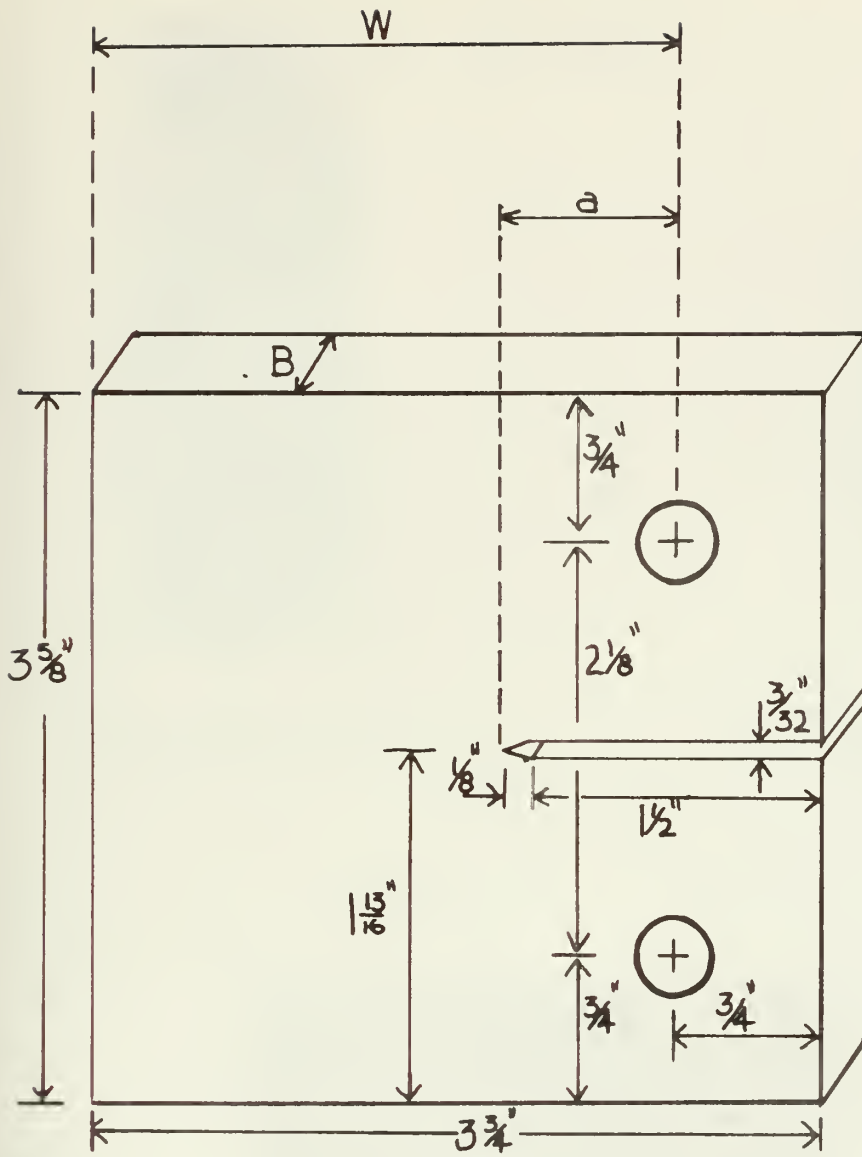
Double Cantilever Beam Fatigue Specimen.
